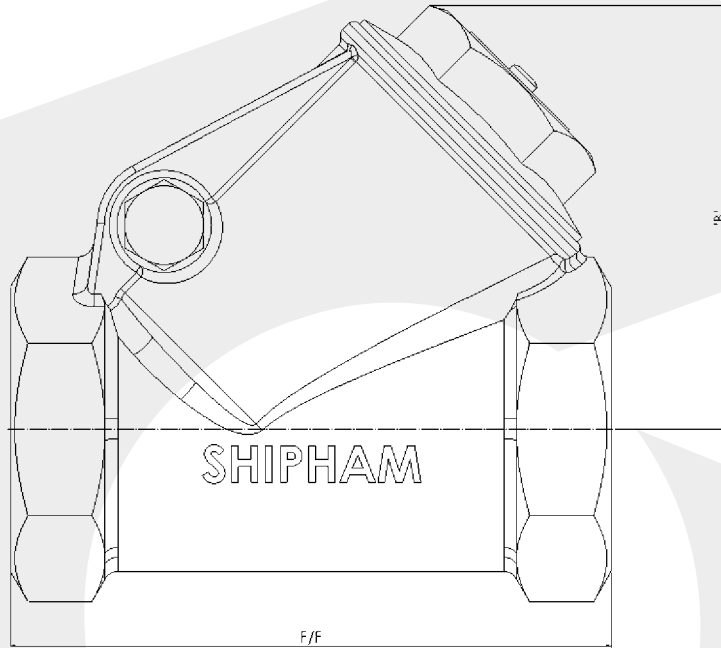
GA drawing swing check valve screwed bonnet (SC01)
